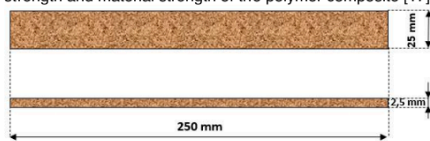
ASTM D 3039 Tensile Test Specimen Size
